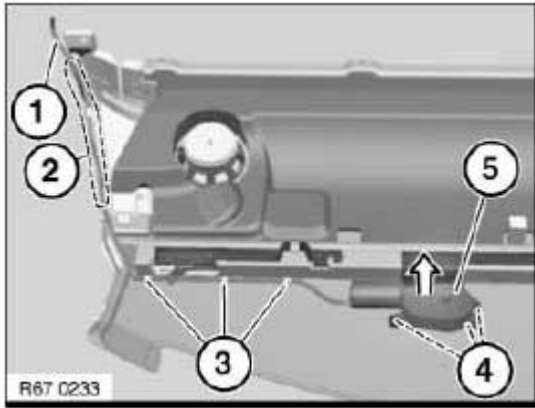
Releasing Screws And Removing Drive Unit For Roller Sun Blind
